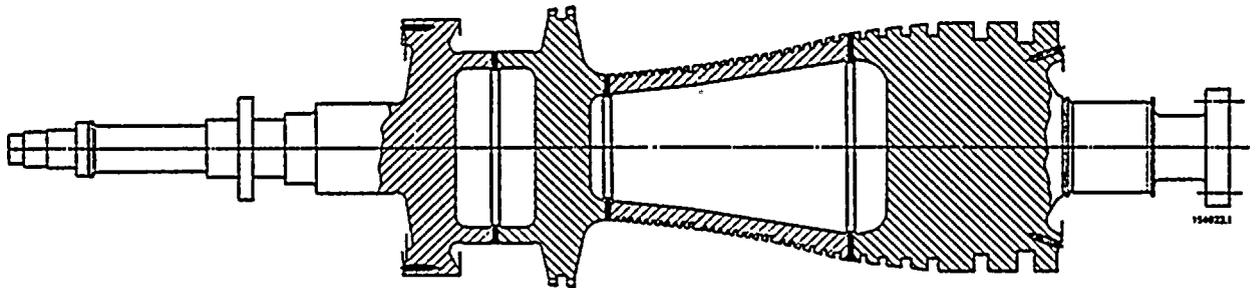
Section through the rotor of a 60 MW condensing turbine.
